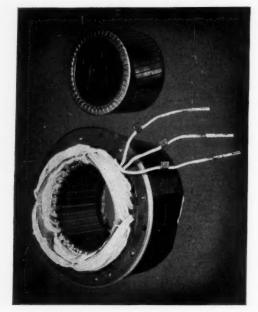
Stator core and rotor may be incorporated in machine to simplify design
